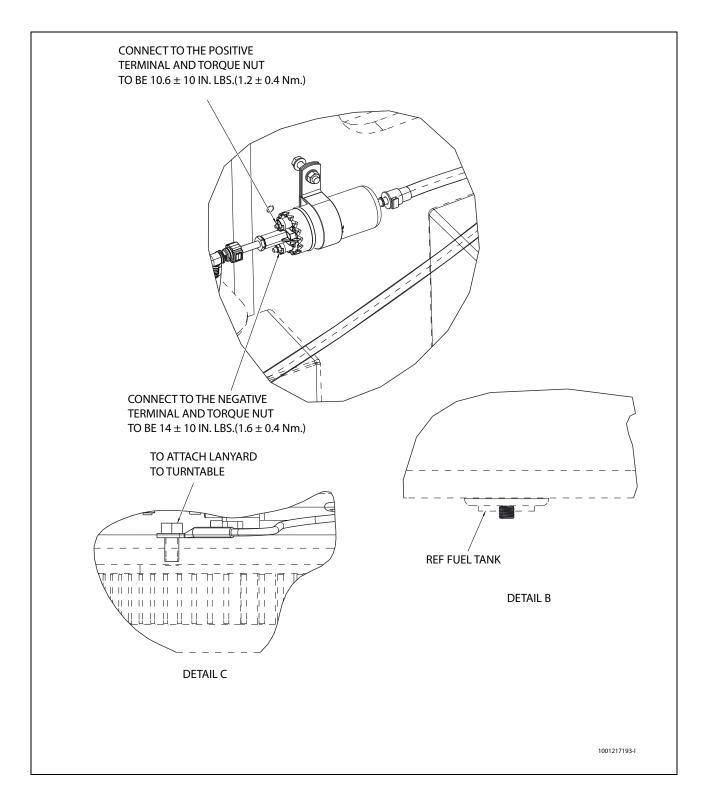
Ford Engine Installation - Sheet 4 of 4
